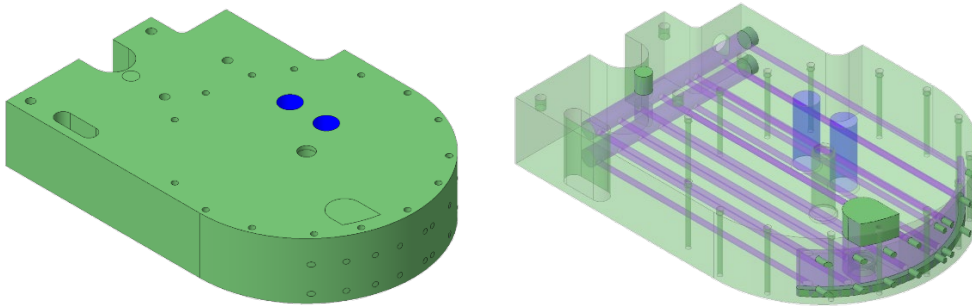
Upper backbone plate machined from stainless steel plate.
